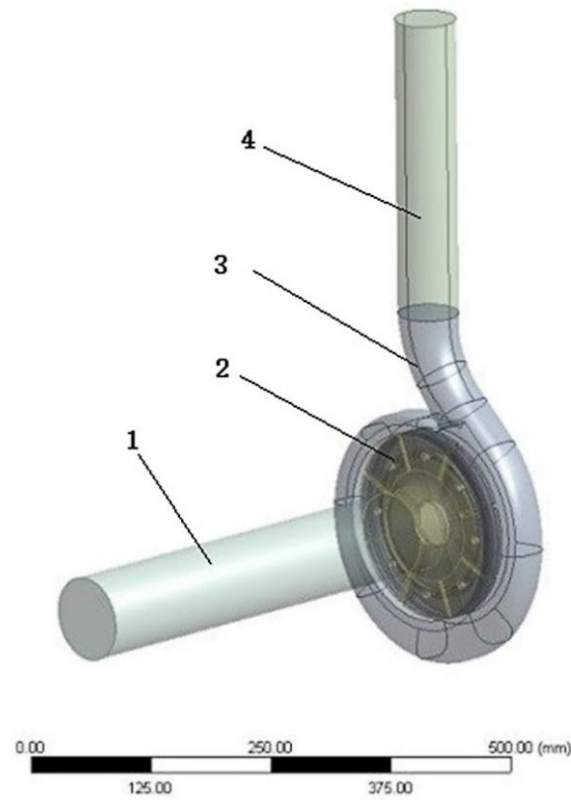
3D model of disc pump flow channel with radial straight blade. 1—inlet extension pipe; 2—impeller; 3—volute casing; 4—outlet extension pipe.
